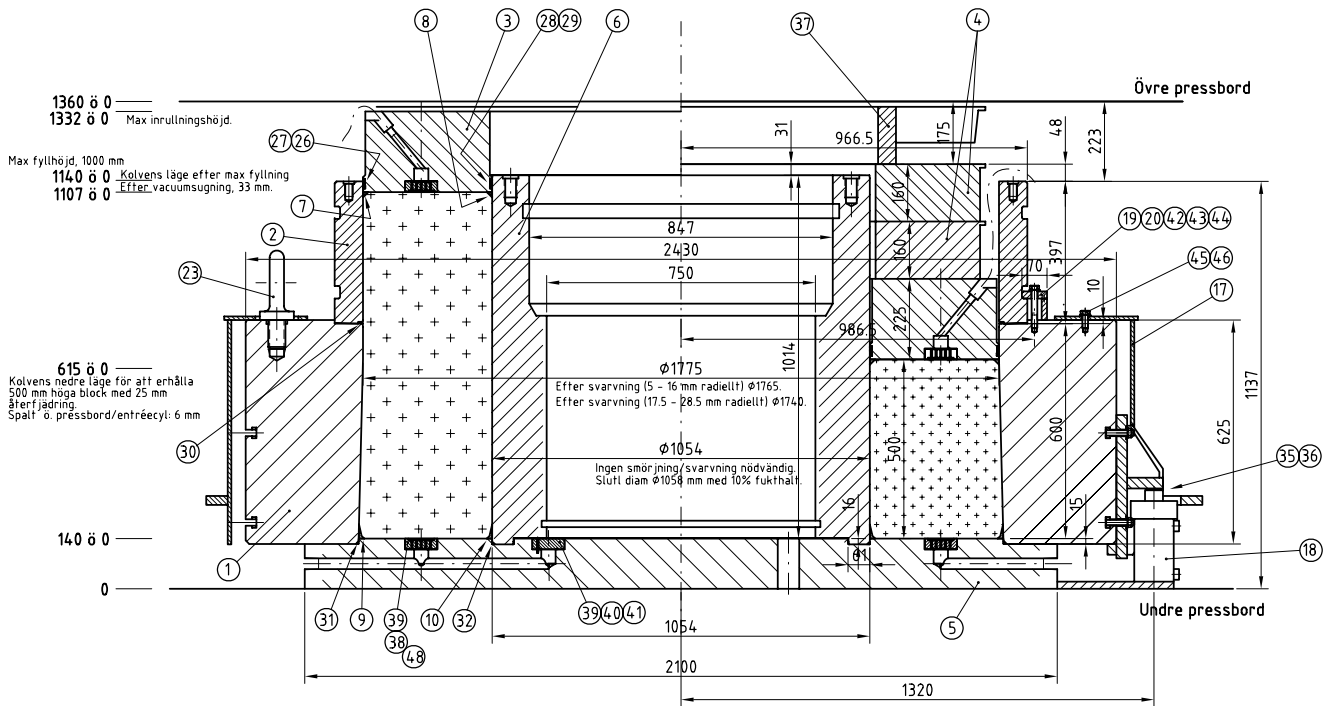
A drawing of the mould prepared for compacting ring shaped blocks.
